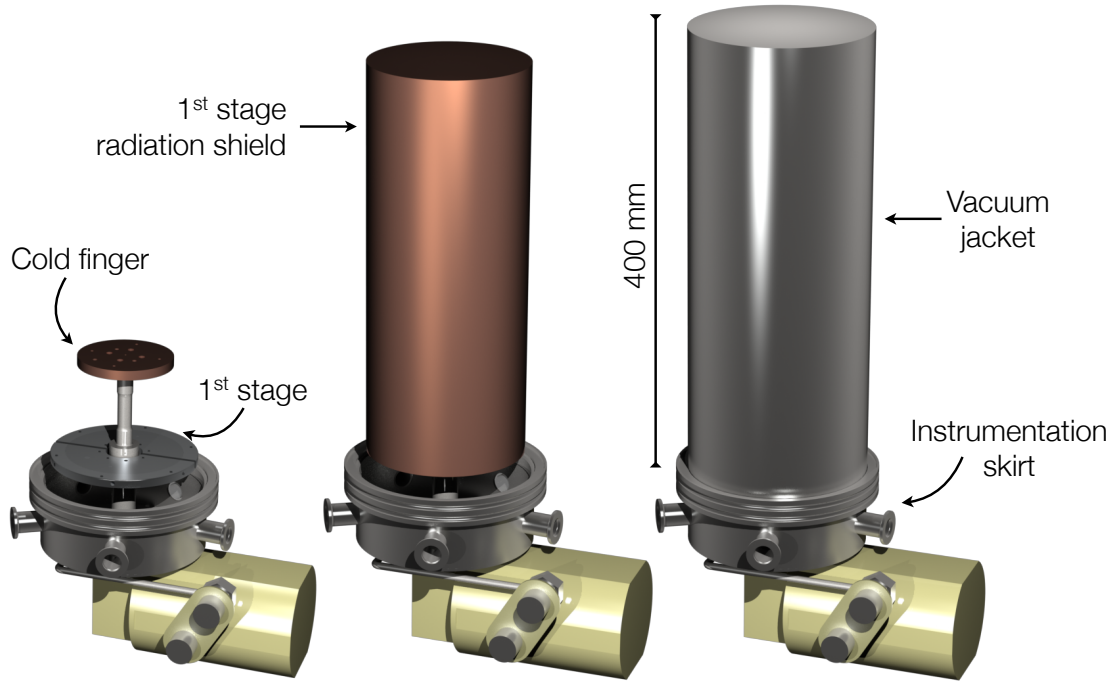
Drawing of the GM cryocooler assembly, as designed for testing of the Engineering Model.
